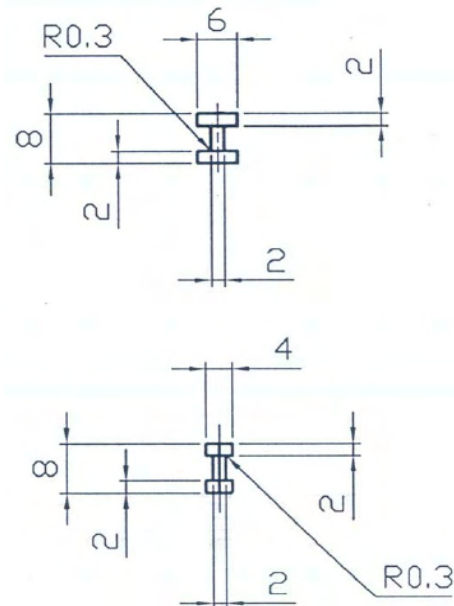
Double-T shaped specimens for the tensile testing of diffusion welded specimens.
